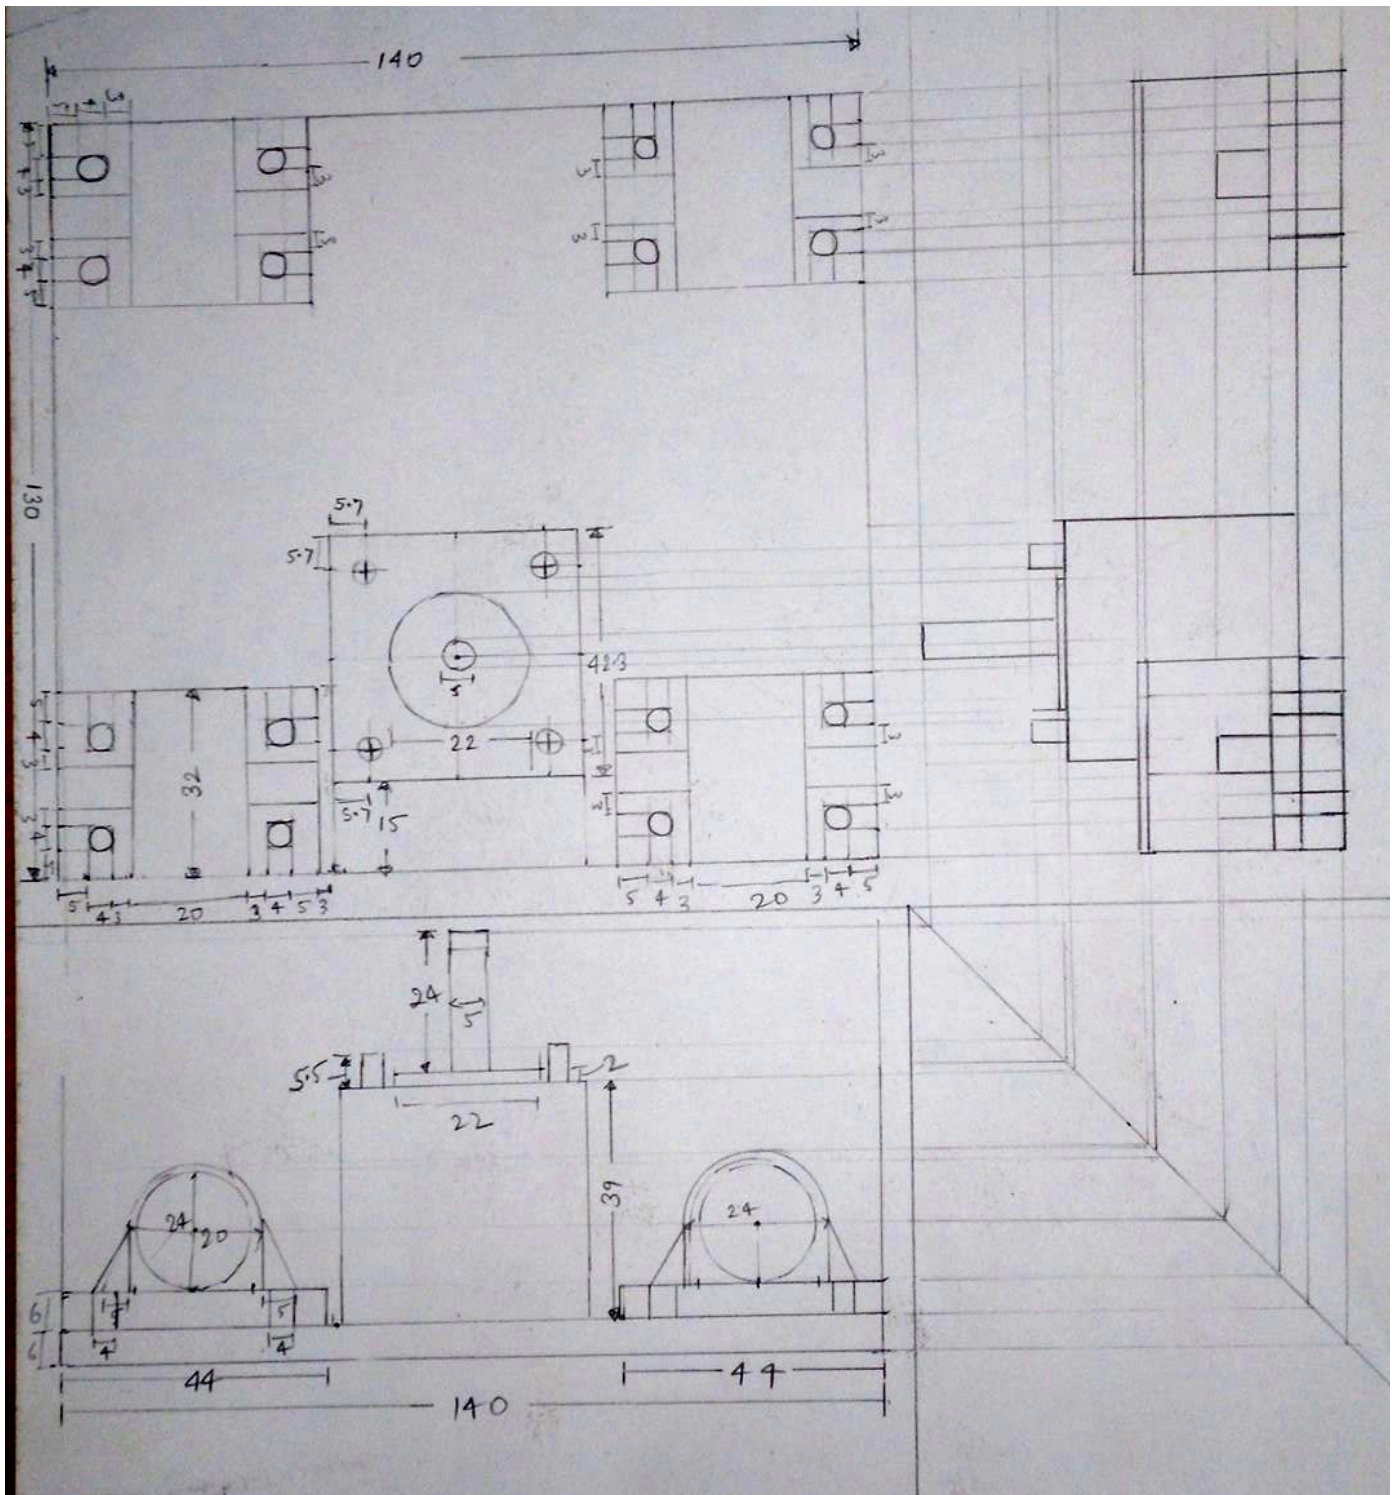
Bottom View, Side left view and the Front view of the chassis containing the stepper motors and Fig6 part through which pipes will run.
